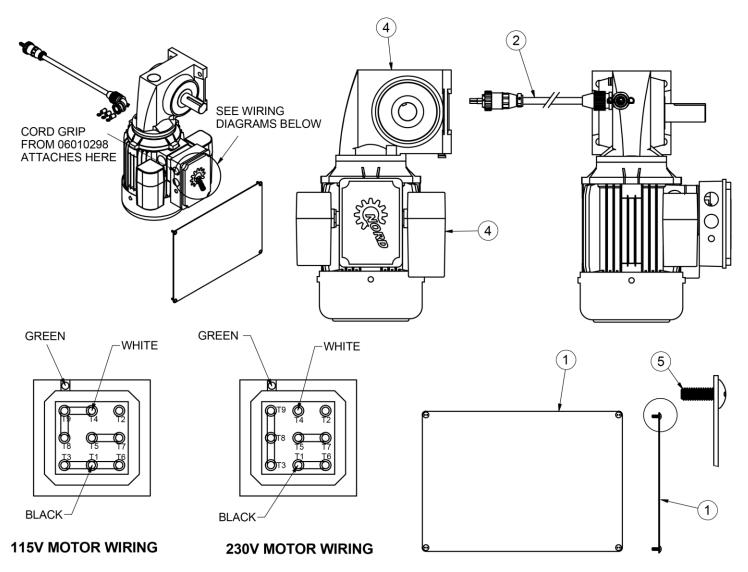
Drive, Motor Wiring, Single Phase, 120V/230V, 60 Hz
